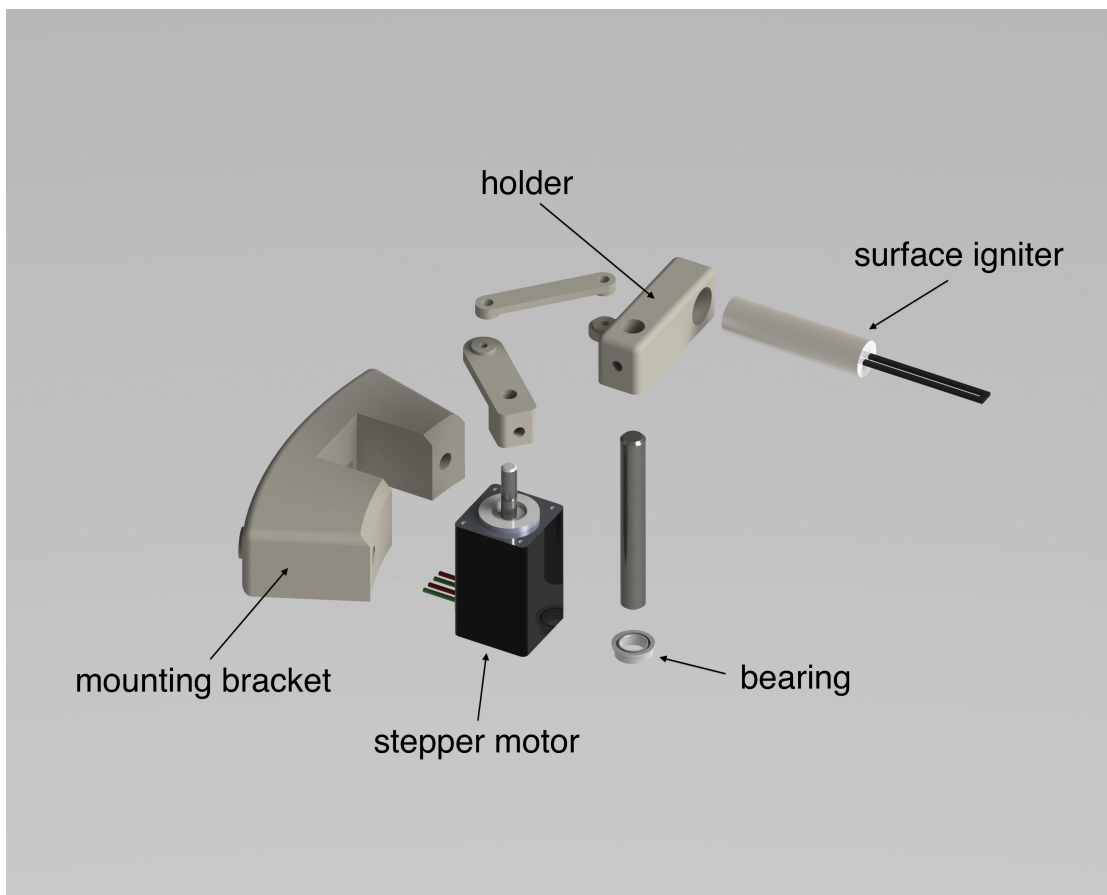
Exploded-view CAD rendering of the igniter assembly used in the HPCEF to establish flames at elevated pressures.
